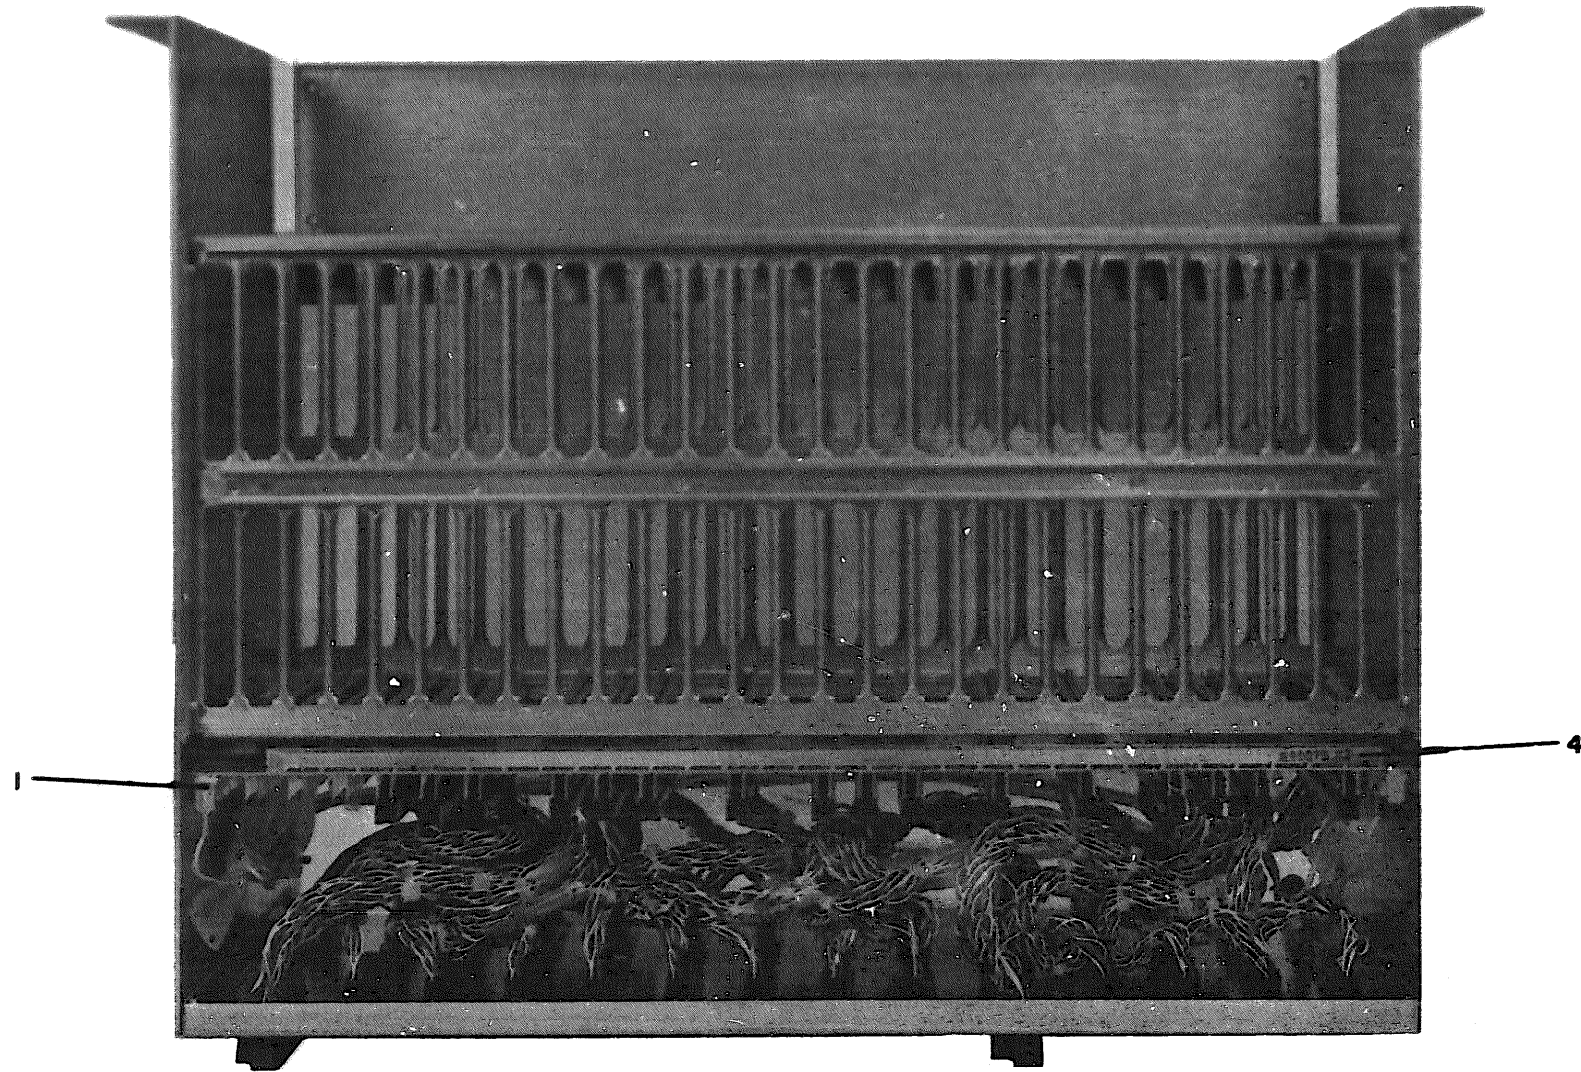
Connector Assembly, Electric (Sheet 1 of 2)
